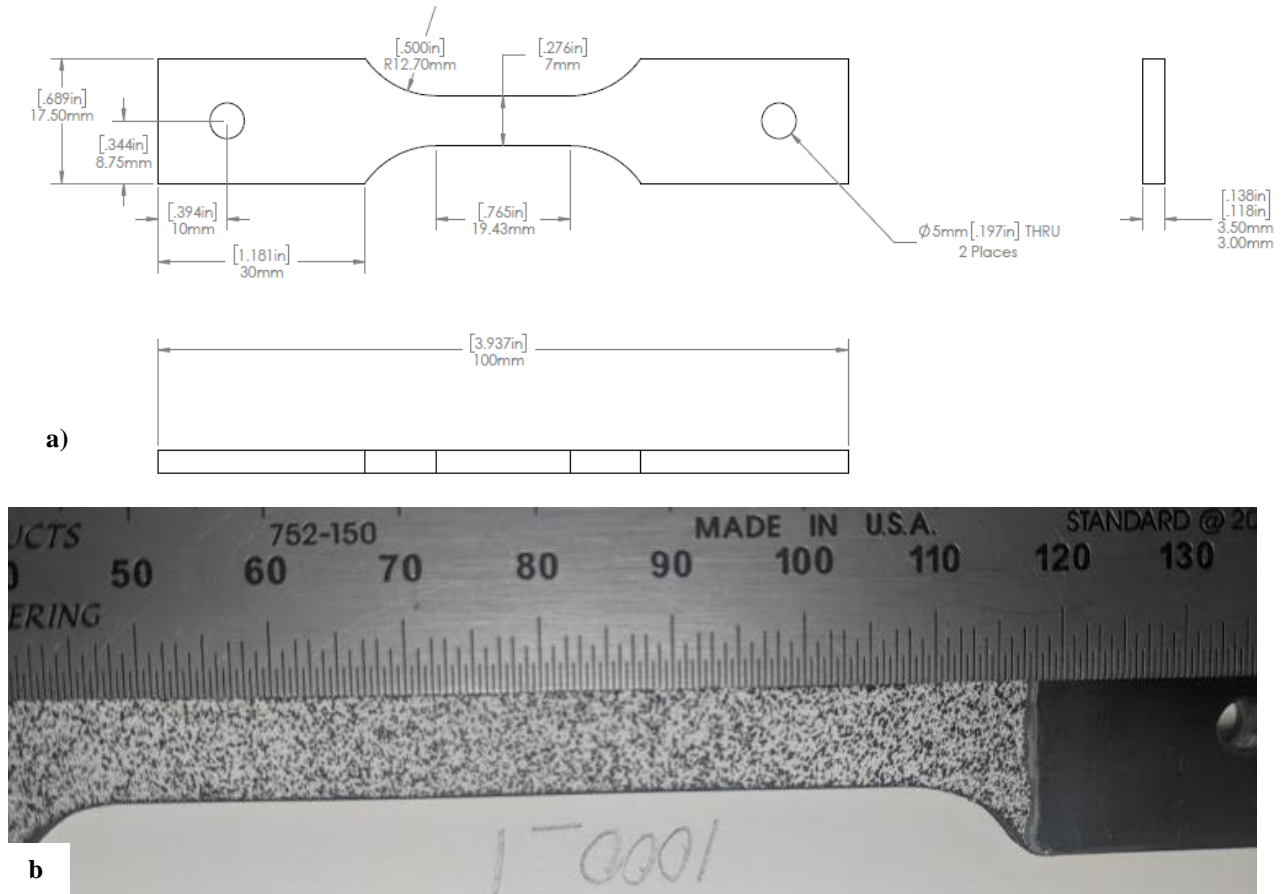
Tensile specimens for Gleeble-based mechanical testing of HSLA-100 steel: a) dimensions for single-reduced gauge section, b) sample speckle pattern for DIC testing (dimensions in mm).
